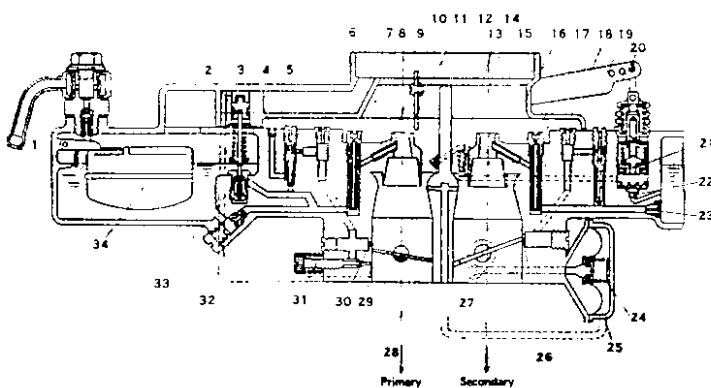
Sectional view of the D3034C carburettor fitted to engines with emission control system
